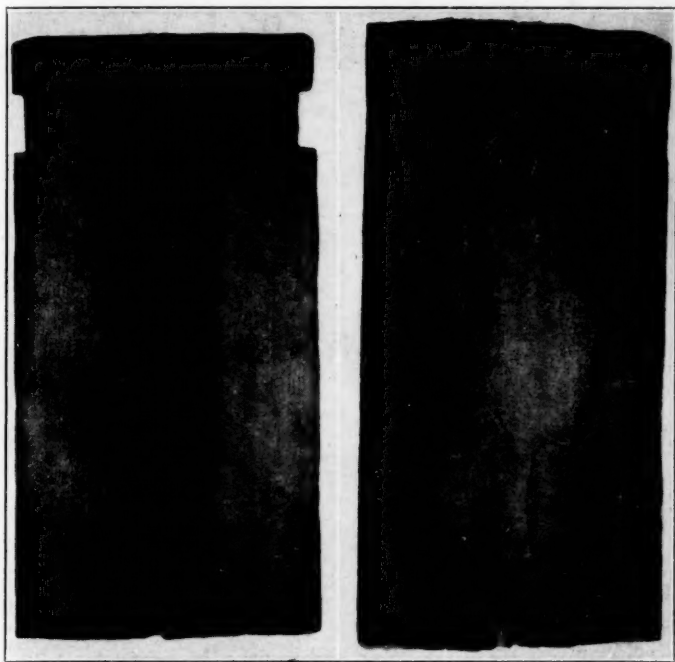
A, CASTING MADE IN IRON MOLD AND SECTIONED—B, CASTING MADE IN SAND MOLD AND SECTIONED
